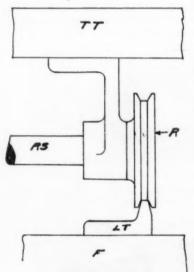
Roll Which Employs a Bearing in Which to Turn
